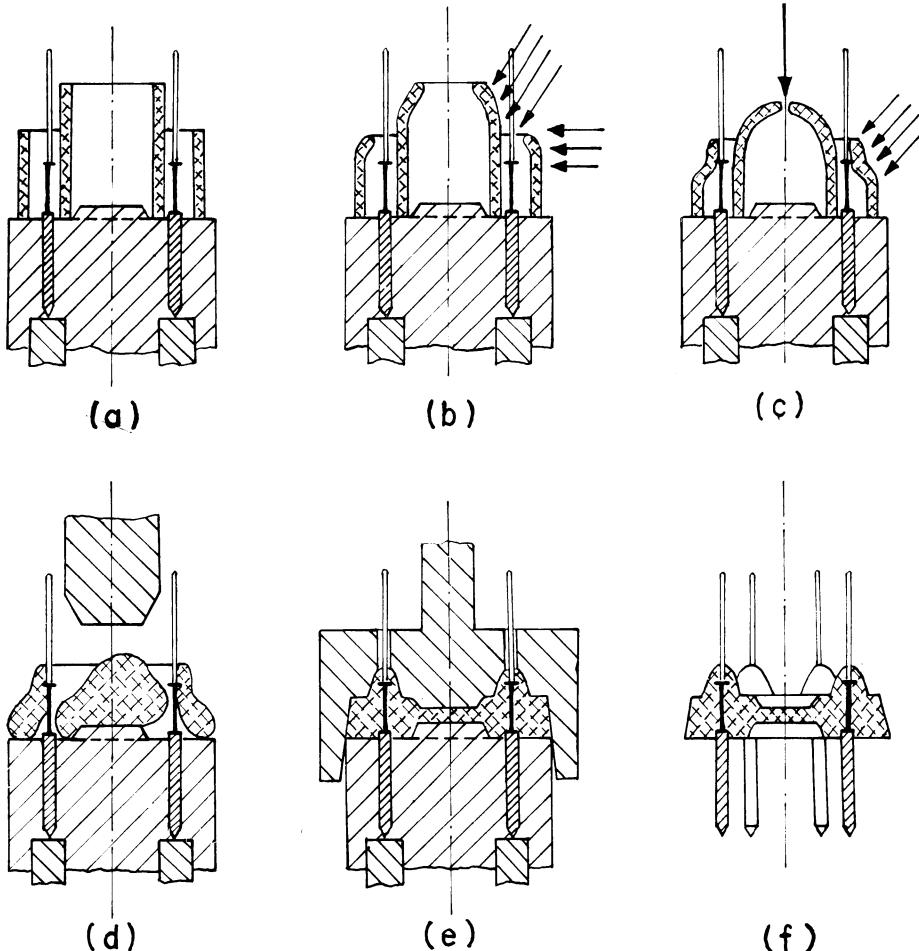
Stages in completing a pin seal: (a) pins and glass rings placed on the holder; (b) preheating (arrows show flames); (c) strong heating (melting); (d) spacing the pins; (e) pressing; (f) finished pin seal
